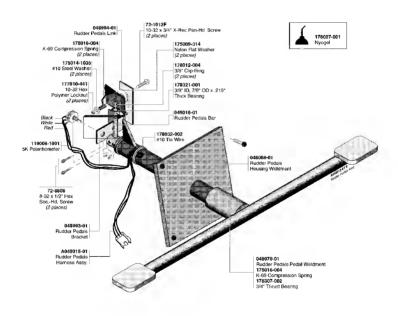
Rudder Pedals Assembly A049013-01 B
